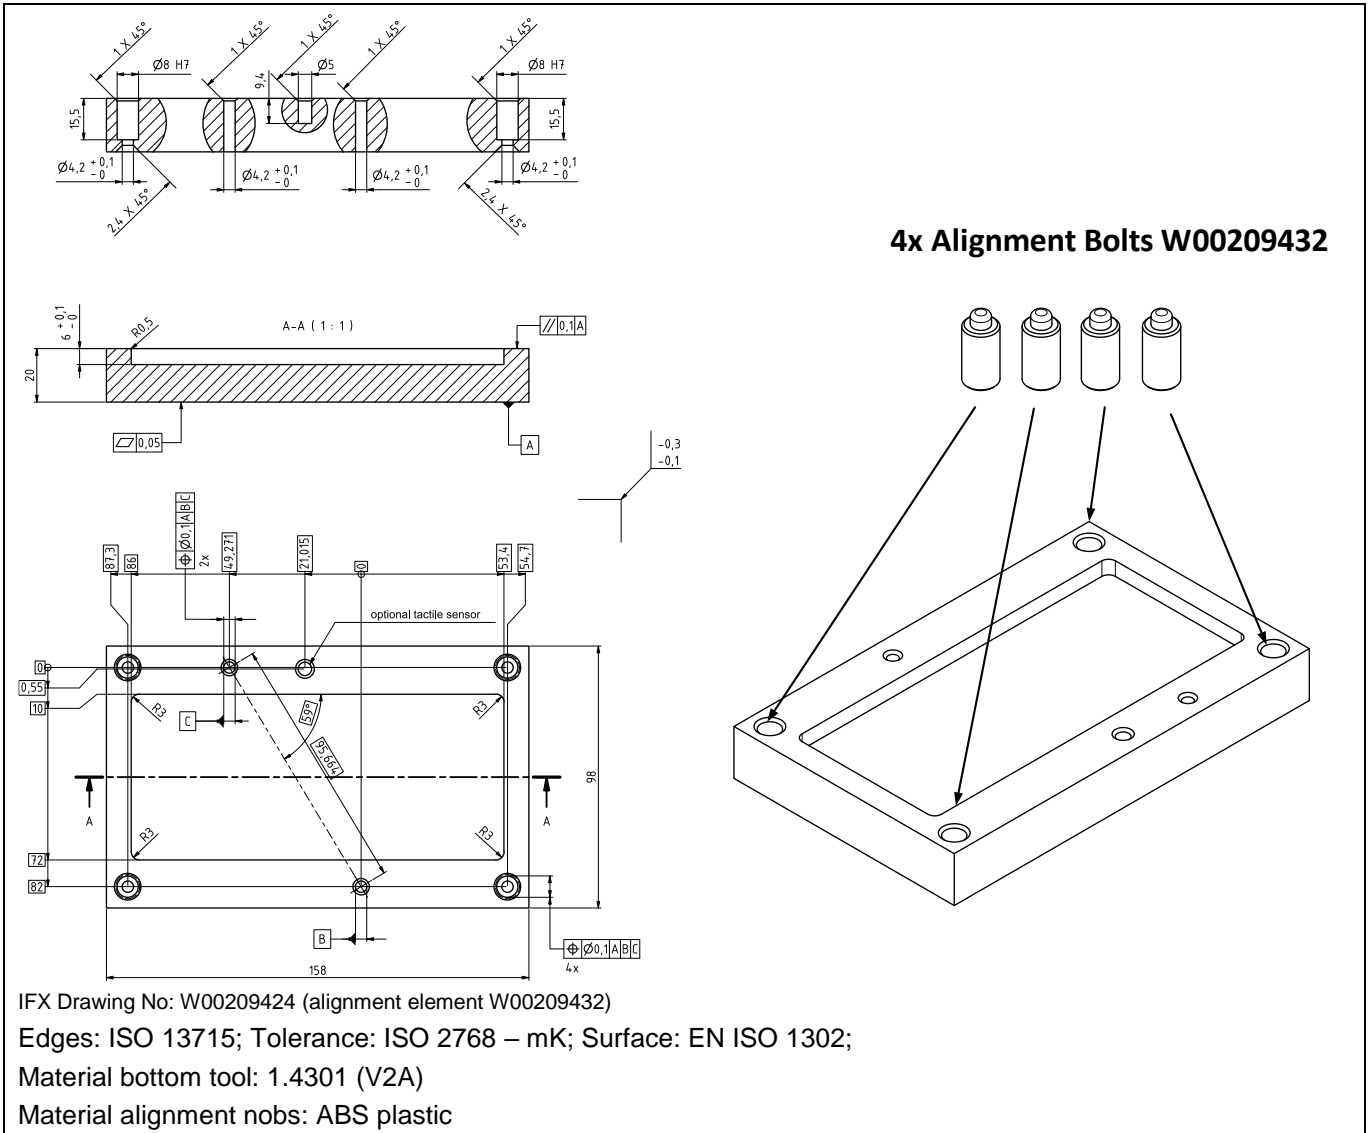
Technical drawing of the sample press-tool (Bottom Tool).
